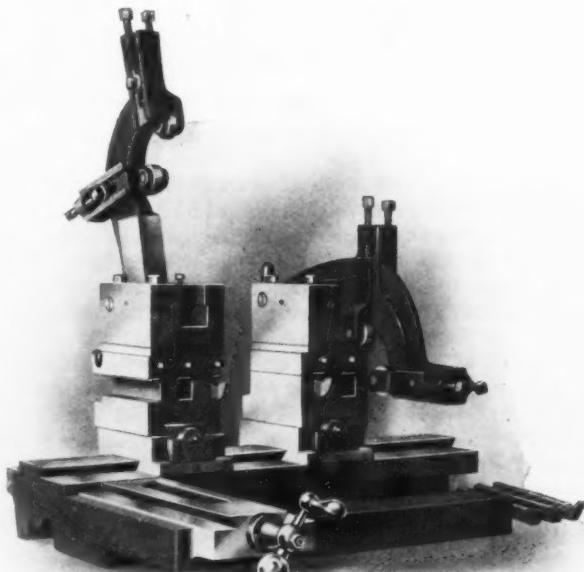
Detail of the Roller Follow Rests and Tool Blocks.
